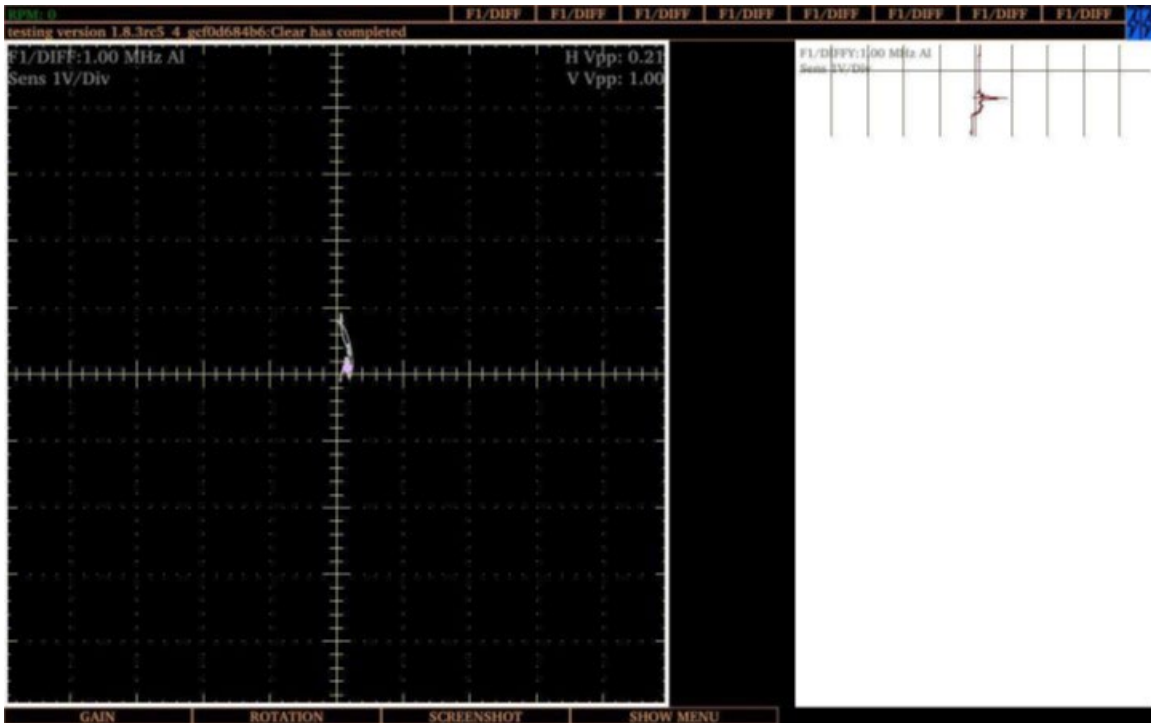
ET indication of defect at Location 3 in butt weld test panel MG-16
